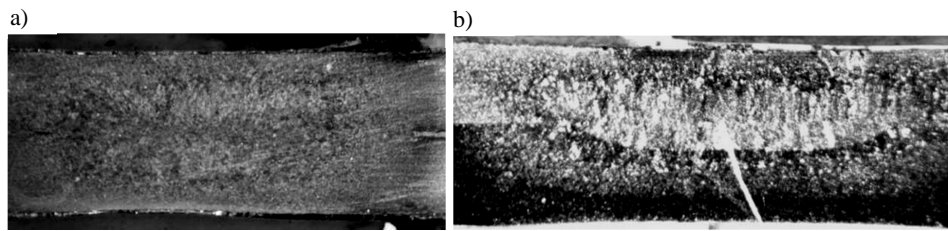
Macrostructure of welded joints: a) standard RSW, b) DeltaSpot RSW
